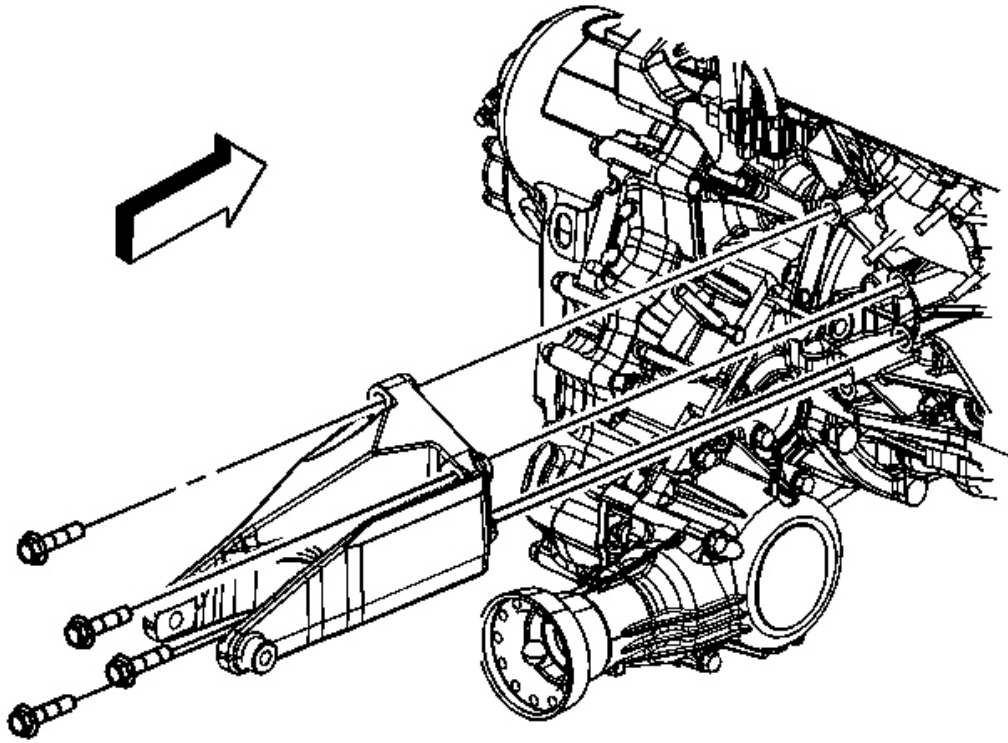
Rear Transmission Mount Bracket To Transmission Bolts
